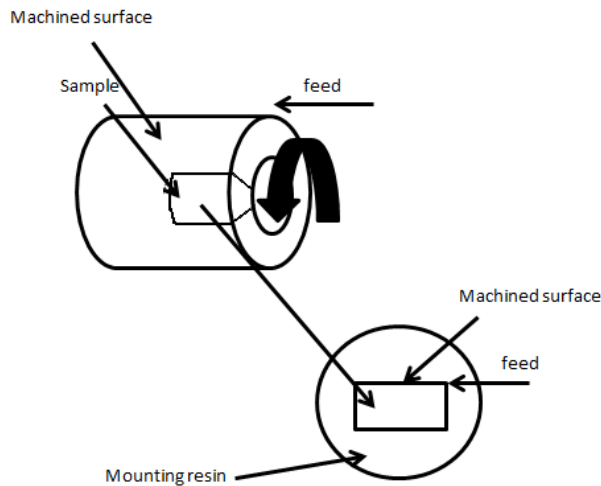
Sketch showing principally how samples were cut from machined rings and mounted in resin.
